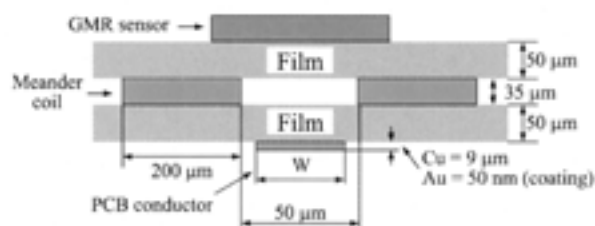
Principal of ECT inspection for PCB conductor.
